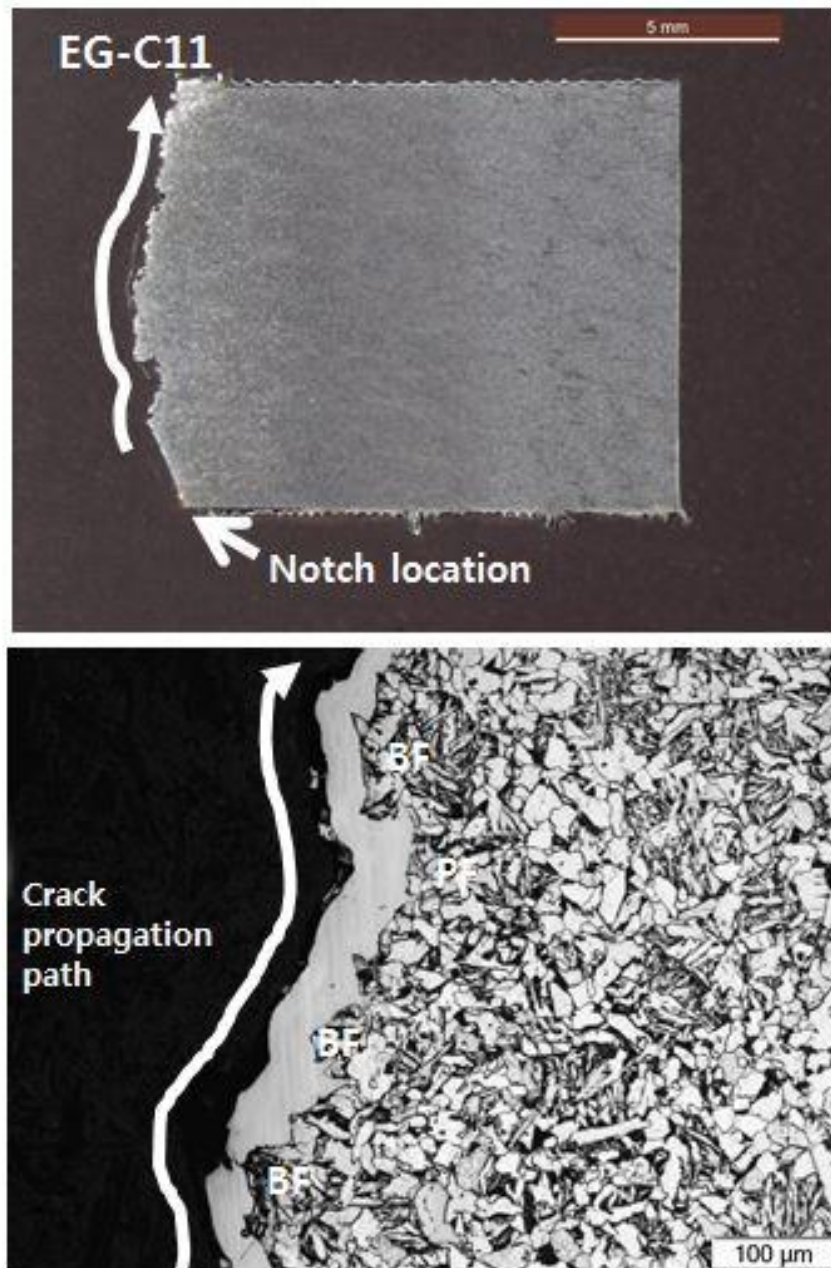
OM micrographs of the cross-sectional area beneath the cleavage fracture surface of the impact toughness fractured at 0°C for the EG-C11 specimen, showing the crack propagation path(Fusion Line+2mm)
